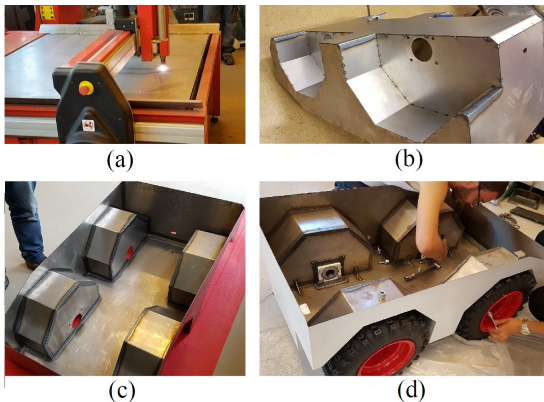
Assembly of early prototype - (a) cutting of steel and aluminum plates by using plasma cutter; (b) welded parts; (c) chassis and carcass; (d) assembly of mechanics system.
